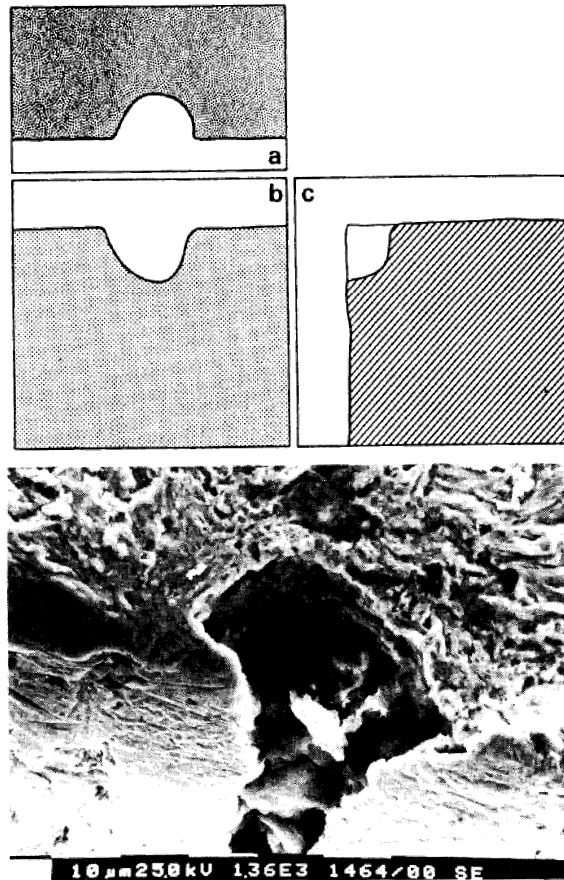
A hole or inclusion as a crack origin. At the top of the figure, (a) the fatigue crack fracture plane, (b) the wire surface and (c) a section through the defect are shown schematically [78].
